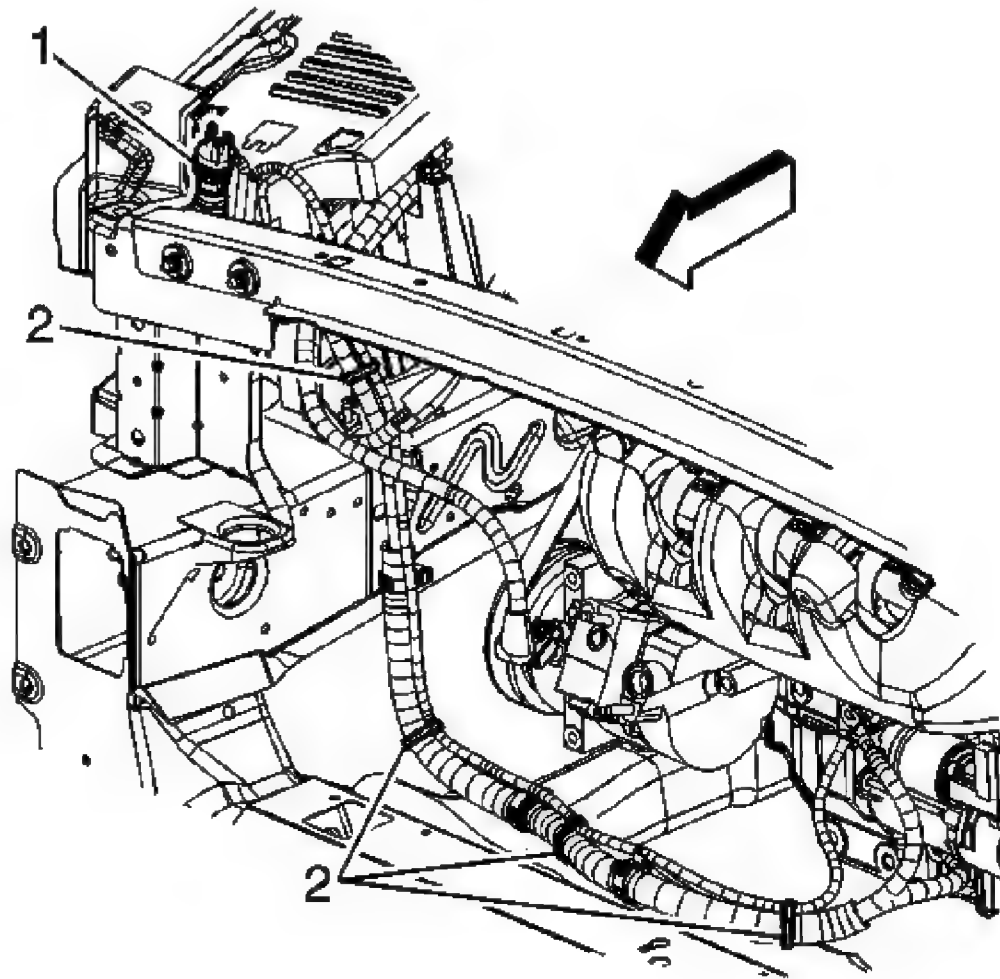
Identifying Coolant Heater Cord (RPO L26)
